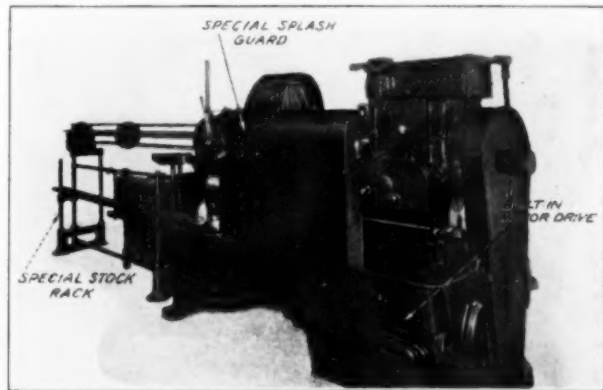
SMALL MULTIPLE-SPINDLE SCREW MACHINE WITH BUILT-IN MOTOR DRIVE
